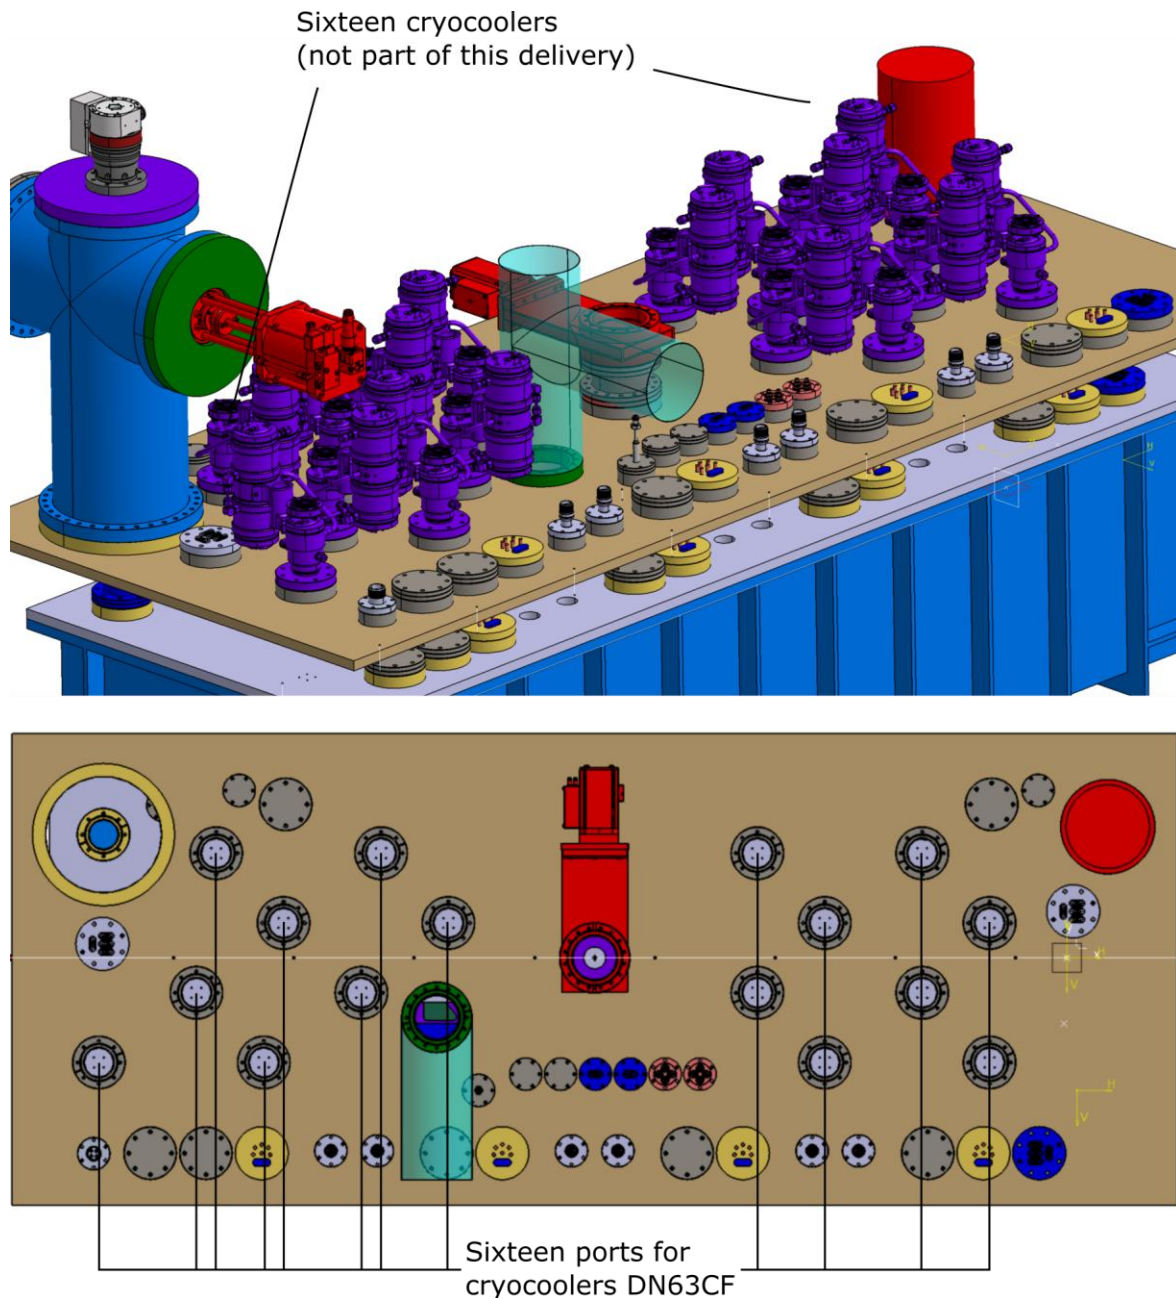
Sixteen cryocoolers and their corresponding ports with DN63CF flanges on the top warm flange.
